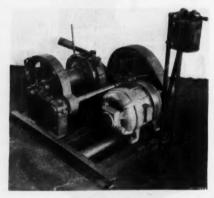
Stronger and lighter is this Dake hoist, built of arc welded steel.
